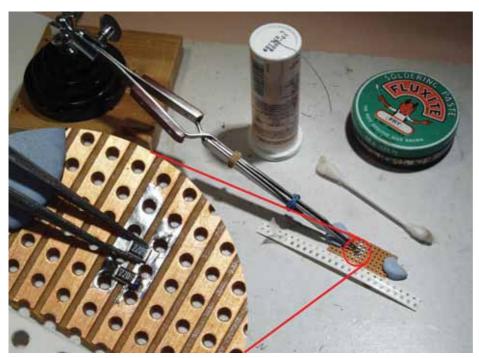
A way to hold components that are liable to slip off the land under pressure. The tube at the back is my home made solder dispenser, and the cotton bud stick was used to wipe off excess solder from the copper strips. The lower resistor is already soldered; the upper is held in place ready for soldering.
